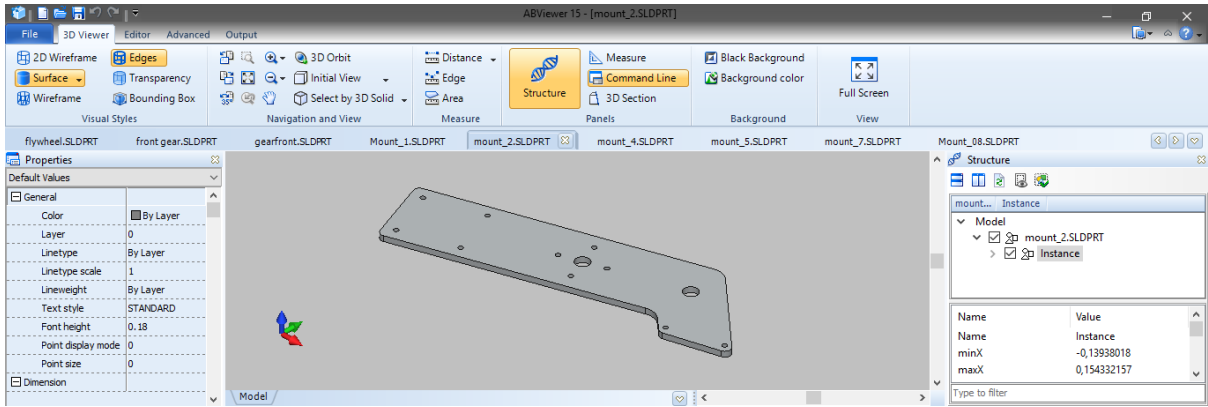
Larger Aluminum Mounting attached with Bicycle Frame
